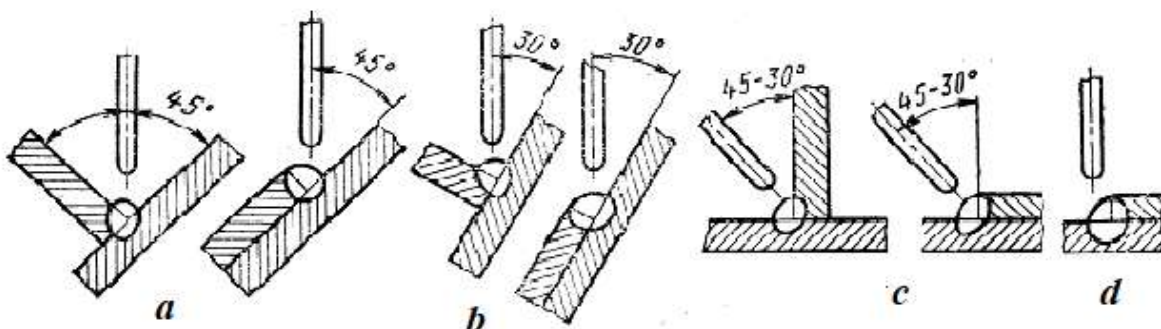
Position of the electrode and the product when performing fillet welds:
